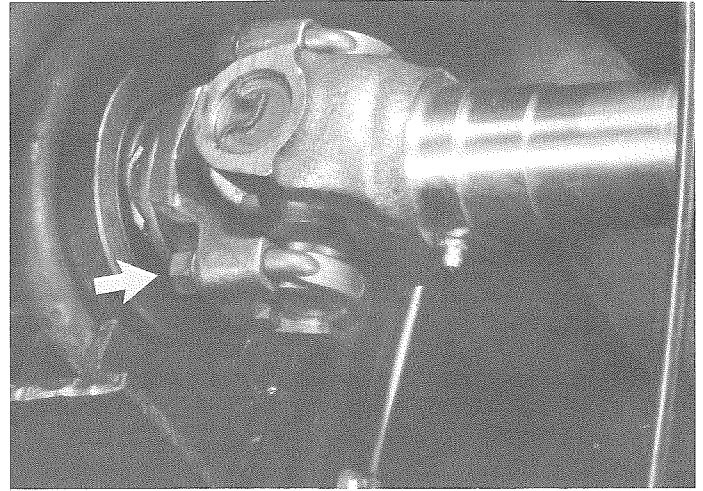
DIFFERENTIAL UNIVERSAL DISCONNECT Remove the four (4) nuts to the two (2) “U” bolts at the main driveshaft universal at the differential. Slide the drive shaft toward the rear and to one side.
